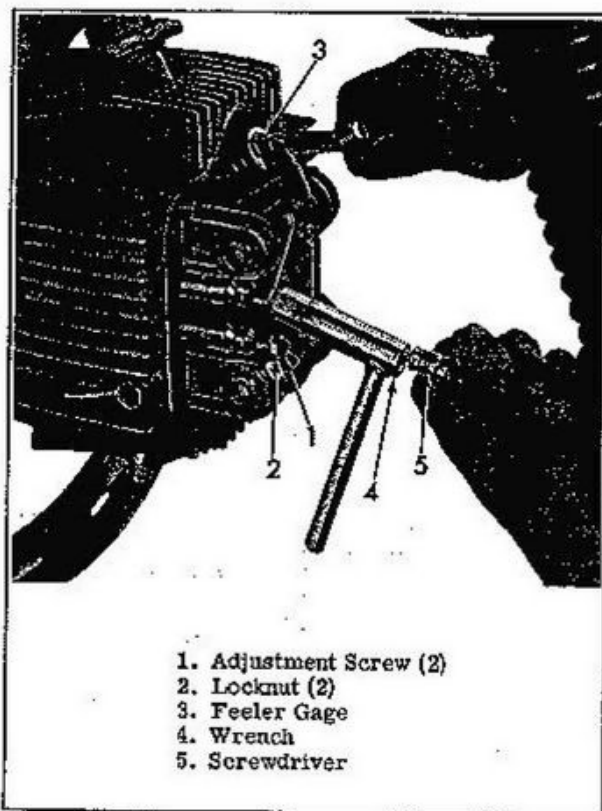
B-16. Tappet Adjustment (1967-72 Shown)
